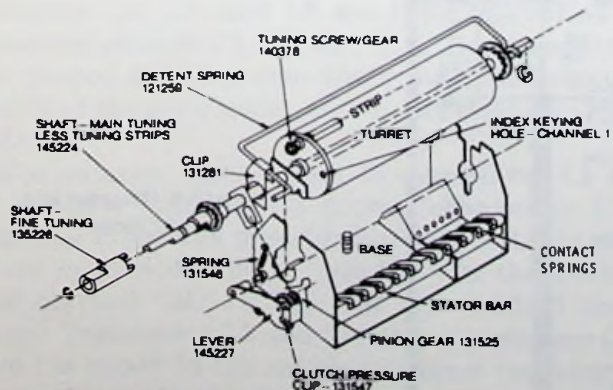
Mechanical detail of the turret tuner showing contact springs and stator bar.
